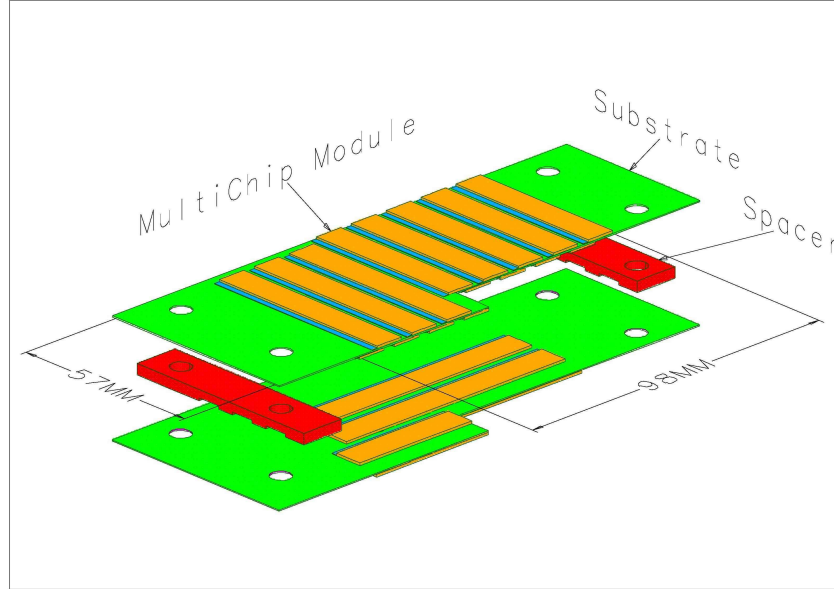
Schematic drawing of pixel modules assembled on the TPG substrates.
